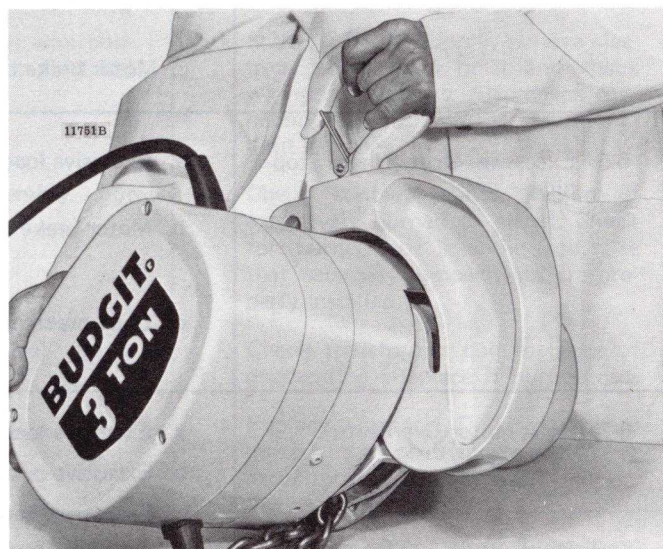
Removing 3 Ton Hanger Bracket from Hoist Frame
